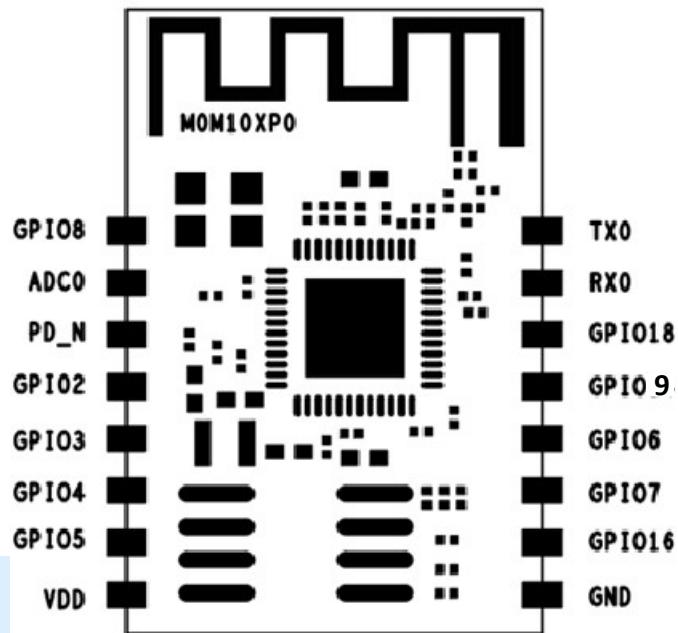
MODULE PIN ARRANGEMENT (BOTTOM VIEW)
